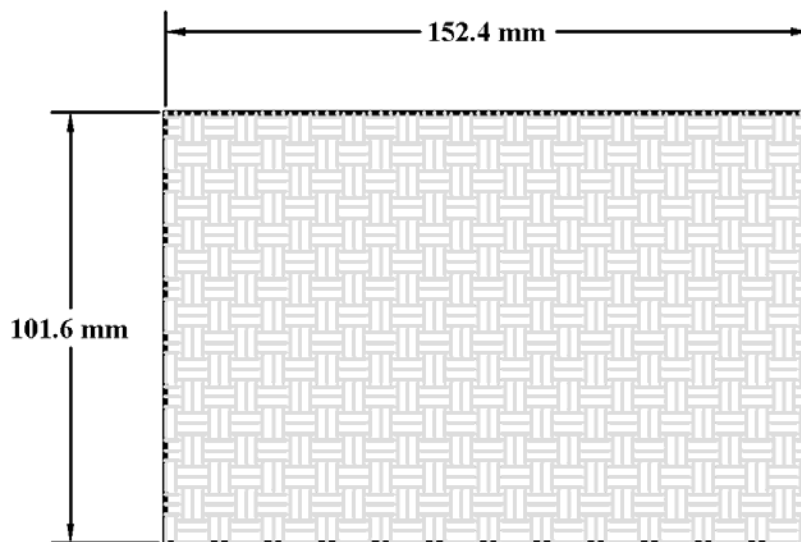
(c) Ballistic impact test specimen dimensions.
